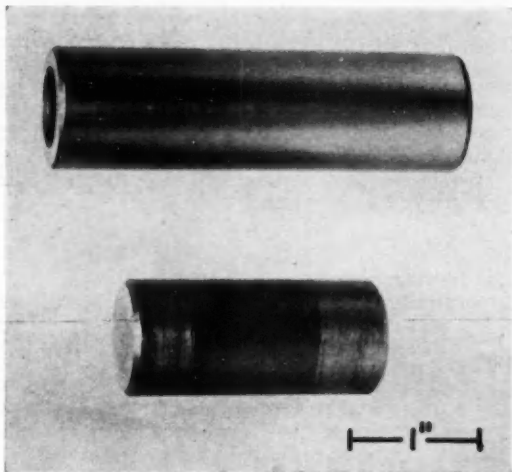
Finished piston pin (top) and slug for cold forming (bottom).
